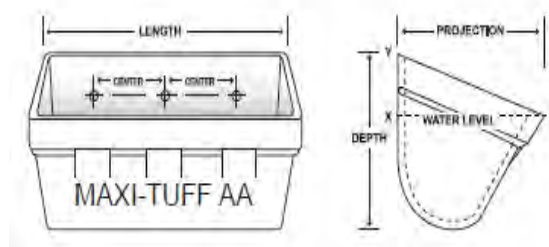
Kinder elevator bucket that is bolted onto an elevator belt (Kinder, 2015)
